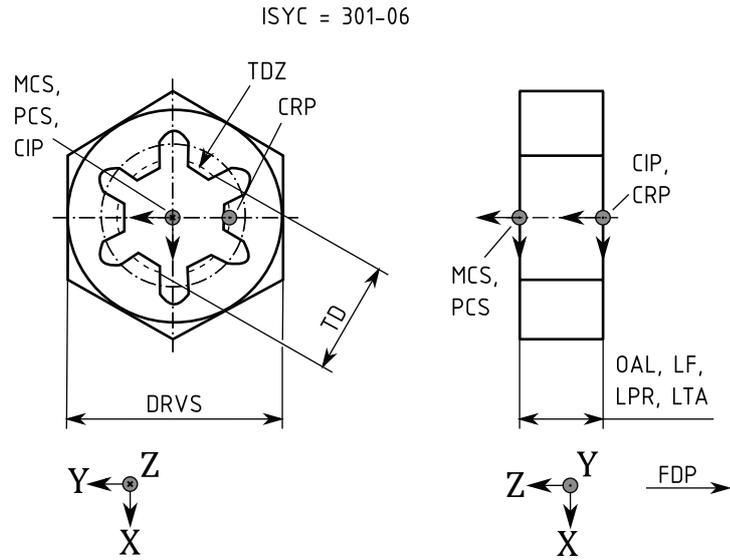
ISYC 301-06 - Thread cutting die, hexagonal shape
